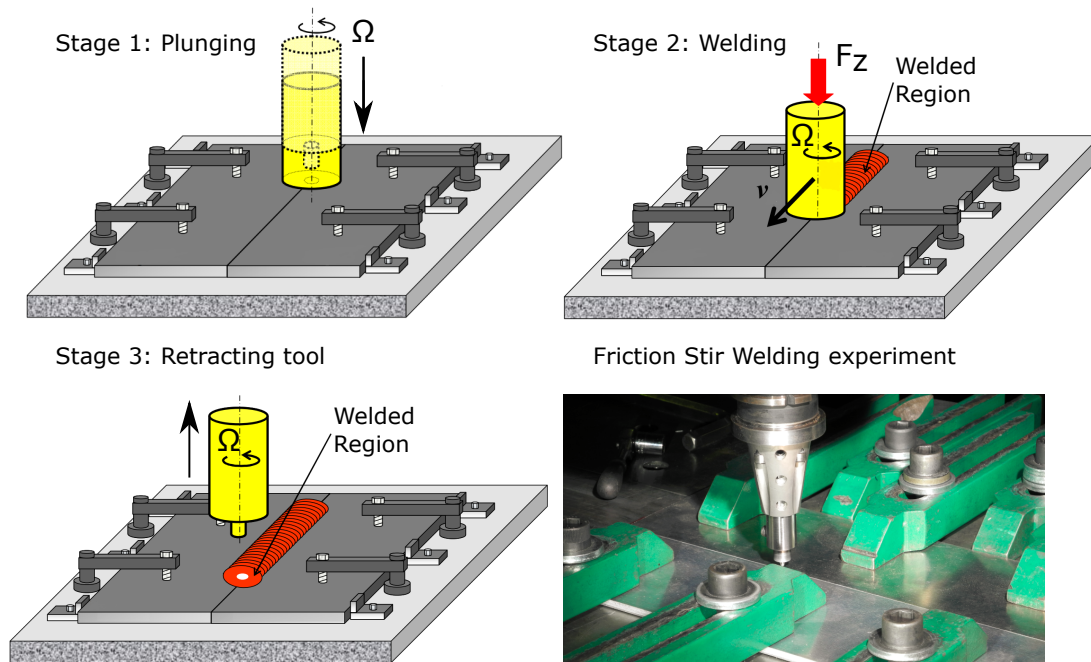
Friction stir welding experiment and its three main stages [2]
